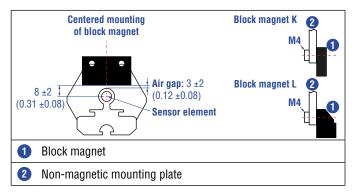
Mounting of block magnet K (part no. 251 298-2) and block magnet L (part no. 403 448)
